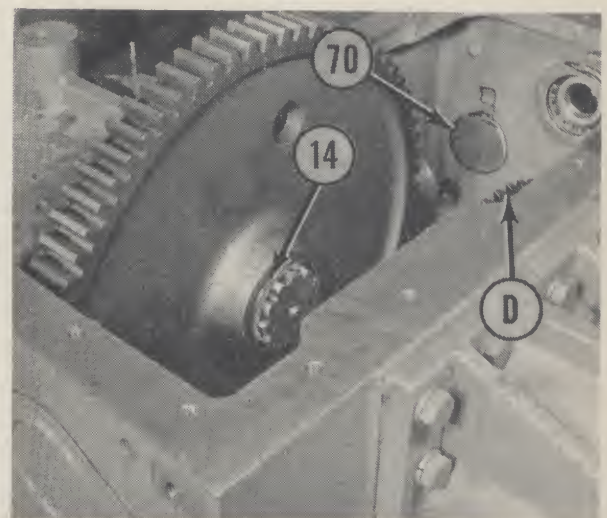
Removal of bevel pinion shaft of 6 speed transmission involves removal of bull gears and bevel ring gear and differential unit.
